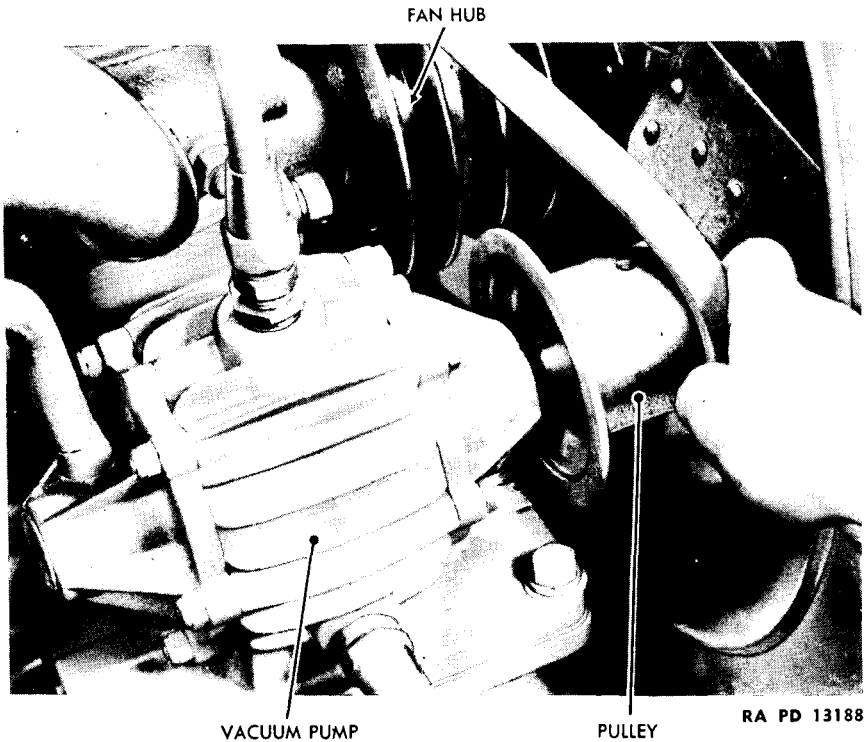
Removing Belt from Vacuum Pump Drive Pulley - (Hercules Diesel)
